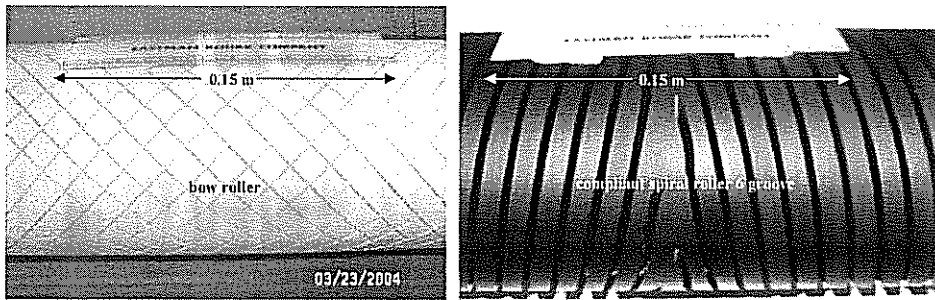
Bow Roller and Compliant Spiral Roller 6 Groove
